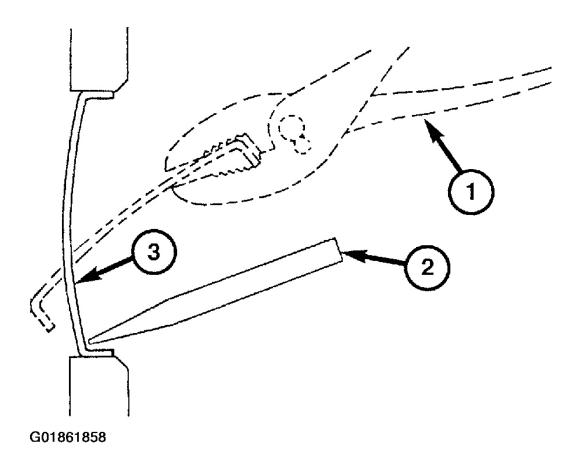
Preparing Engine Core & Oil Gallery Plugs Courtesy of DAIMLERCHRYSLER CORP.
